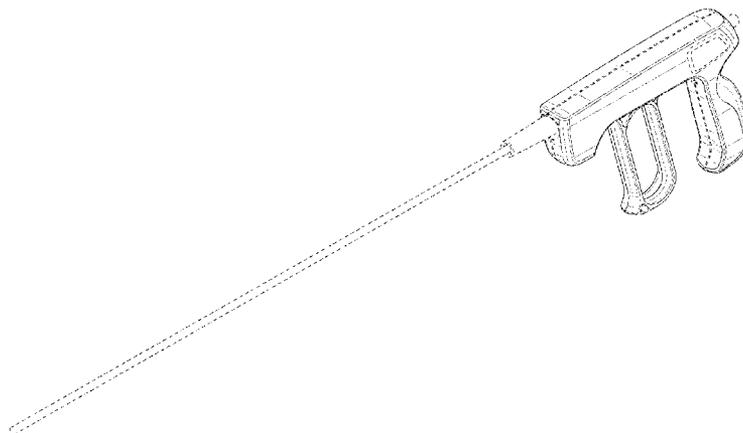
is a front perspective view of medical device handle illustrating our new design;
